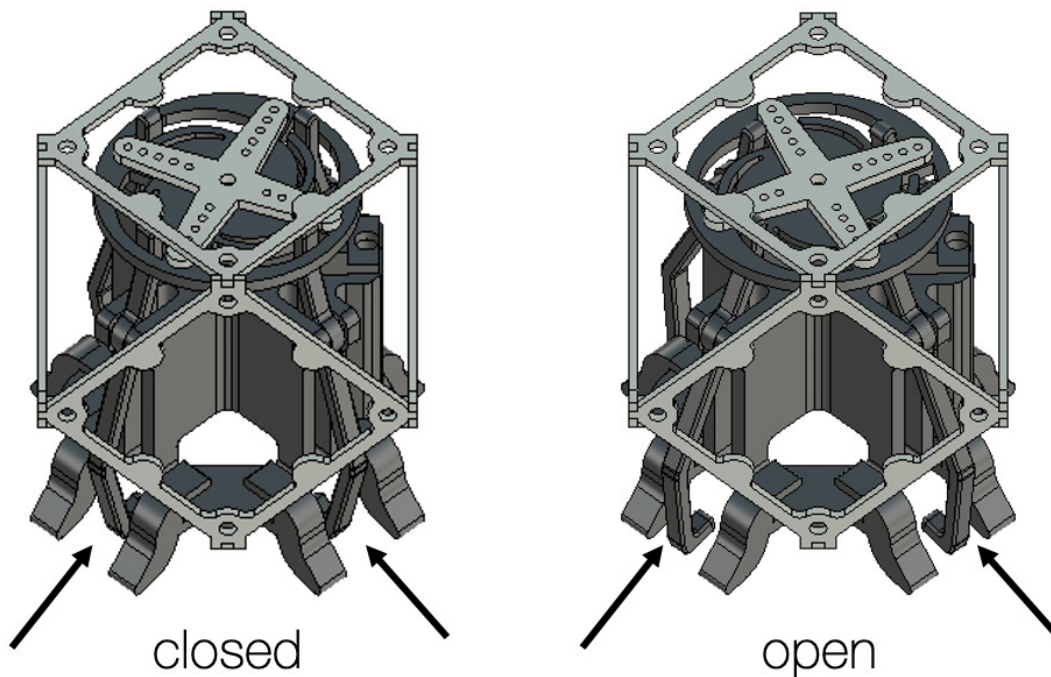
CAD render of open and closed gripper positions. Left: closed. Right: open.
